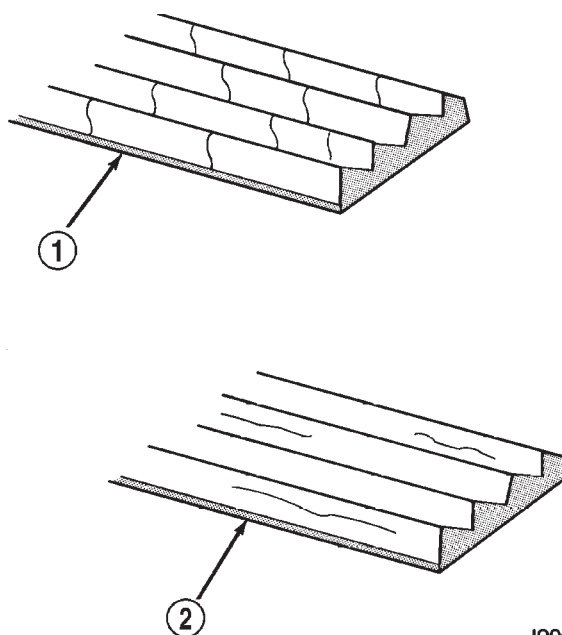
Serpentine Accessory Drive Belt Wear Patterns
